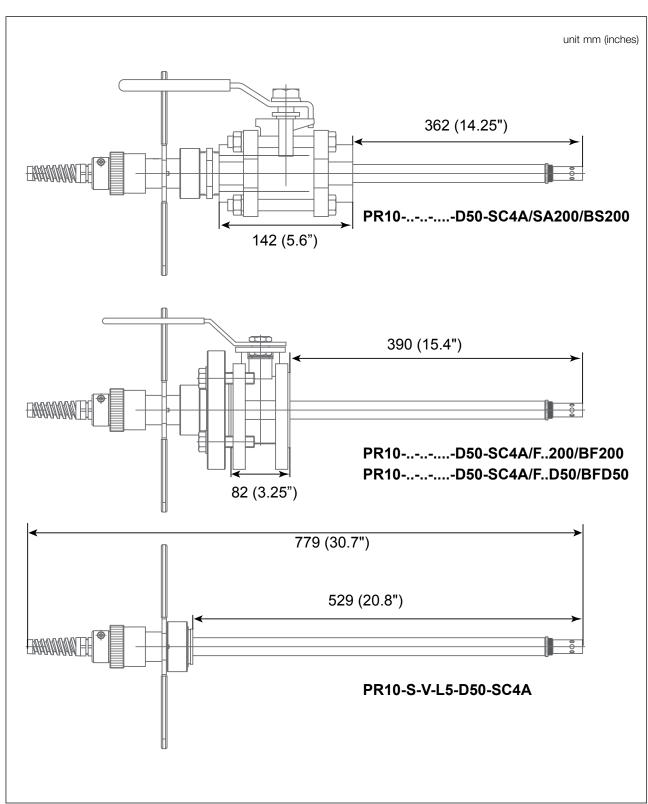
Dimensional drawing PR10...-D50 with mounted SC4A sensor
